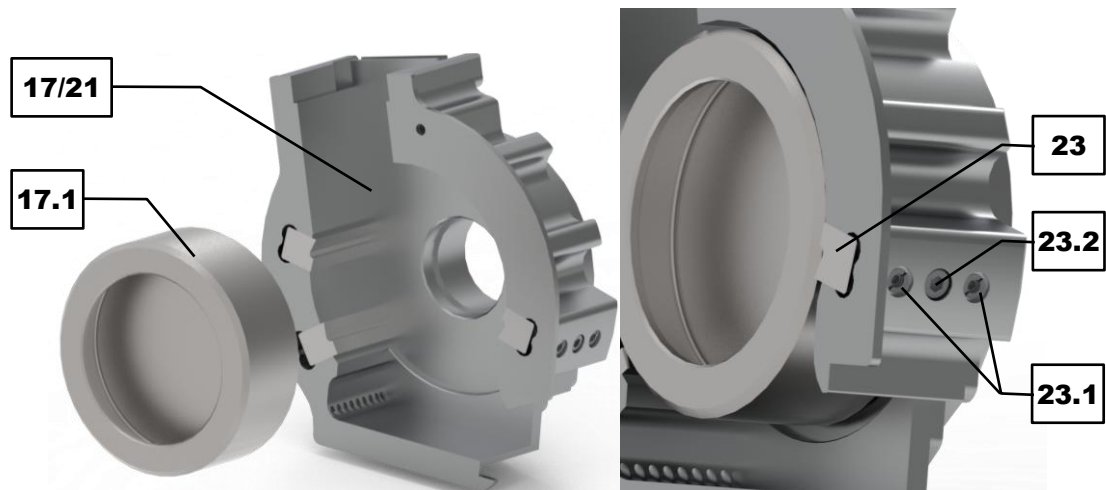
Inserting the adjustment aid and adjusting the cutting bars
